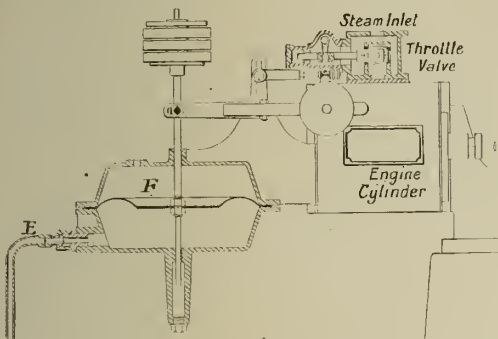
Diaphragm Governor, Operating the Throttle-Valve of the Steam-Engine.
